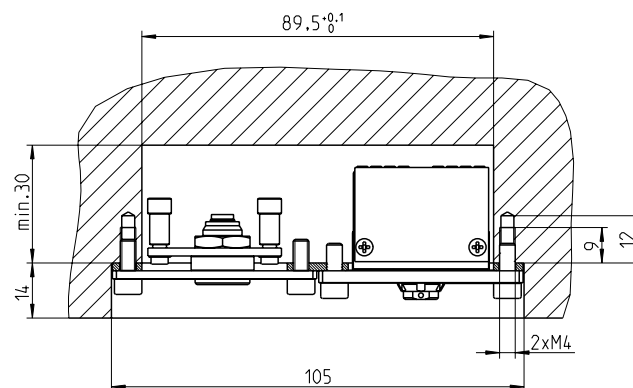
Mounting dimensions for multi sensor set consisting of Type 1708A1 and 2205A...
